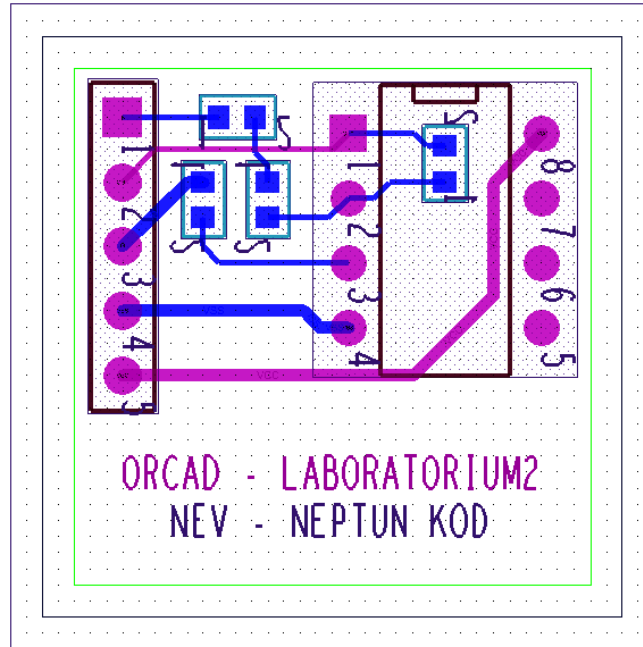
Finished PCB design - with placement, wiring and label suggestions (colors inverted).
